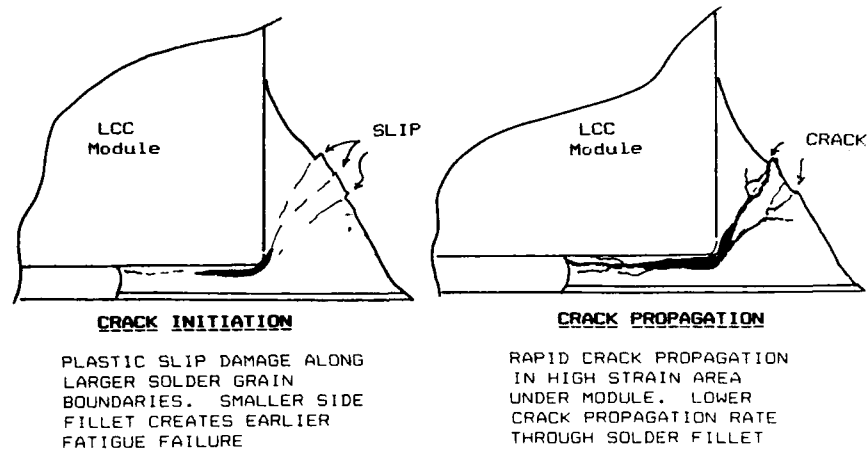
TYPICAL LCC SOLDER JOINT FATIGUE DAMAGE
